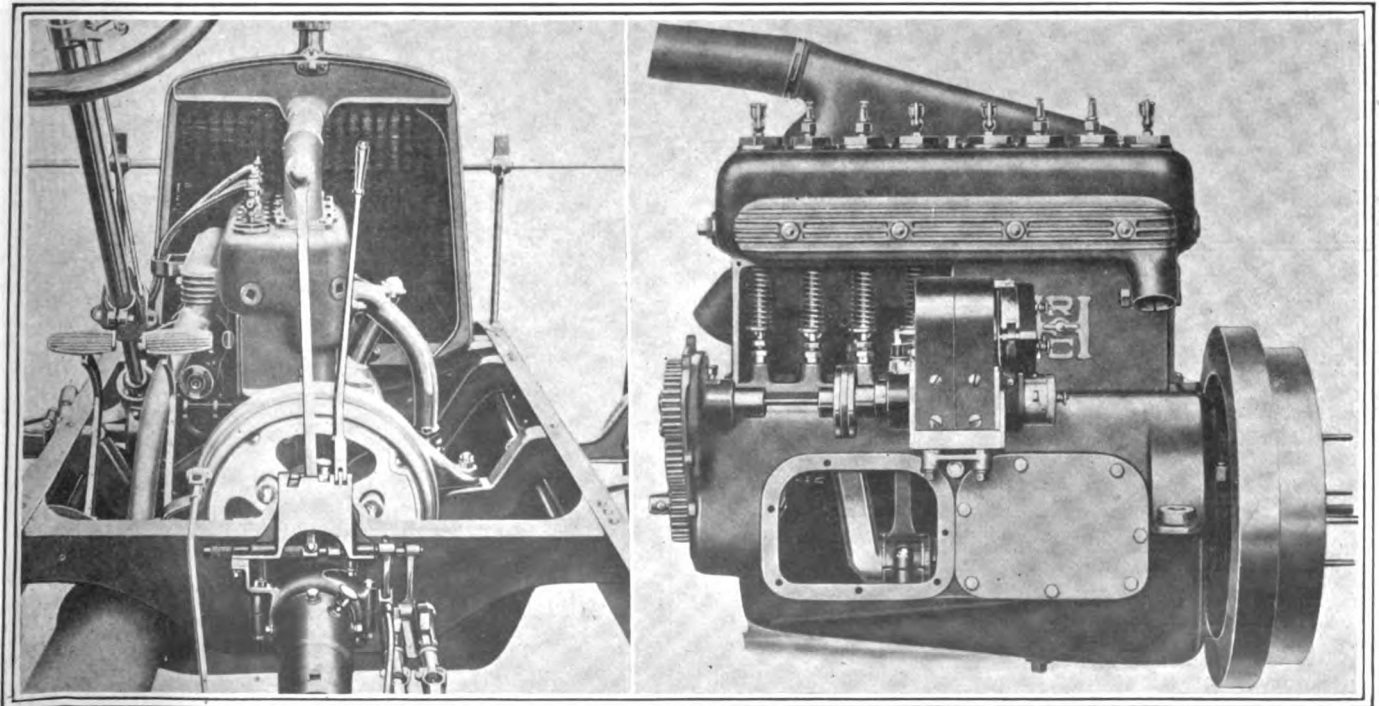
Mounting of control levers and rigid cross member supporting clutch; view of magneto side of motor
